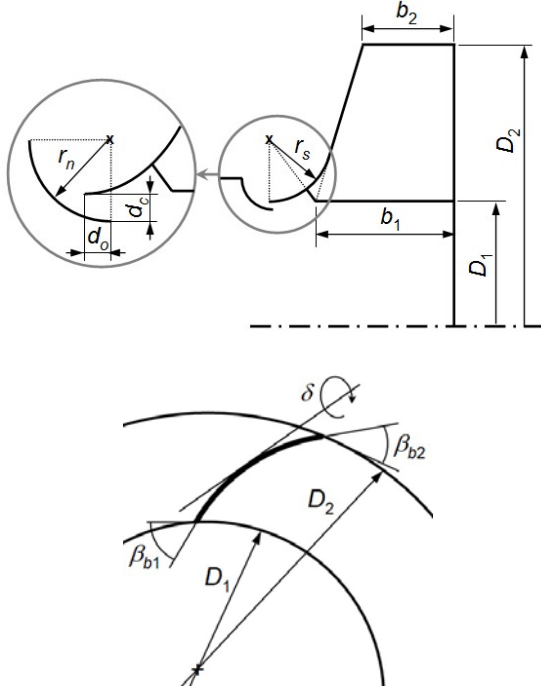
Side view and top view of the impeller with indication of the geometrical parameters
